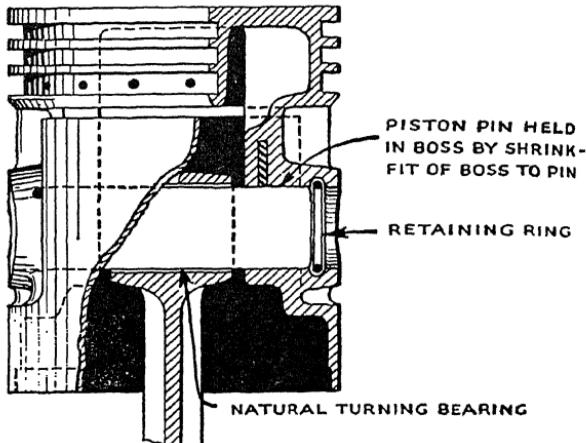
Piston Pin Retained by Means of Hardened Steel Ring
